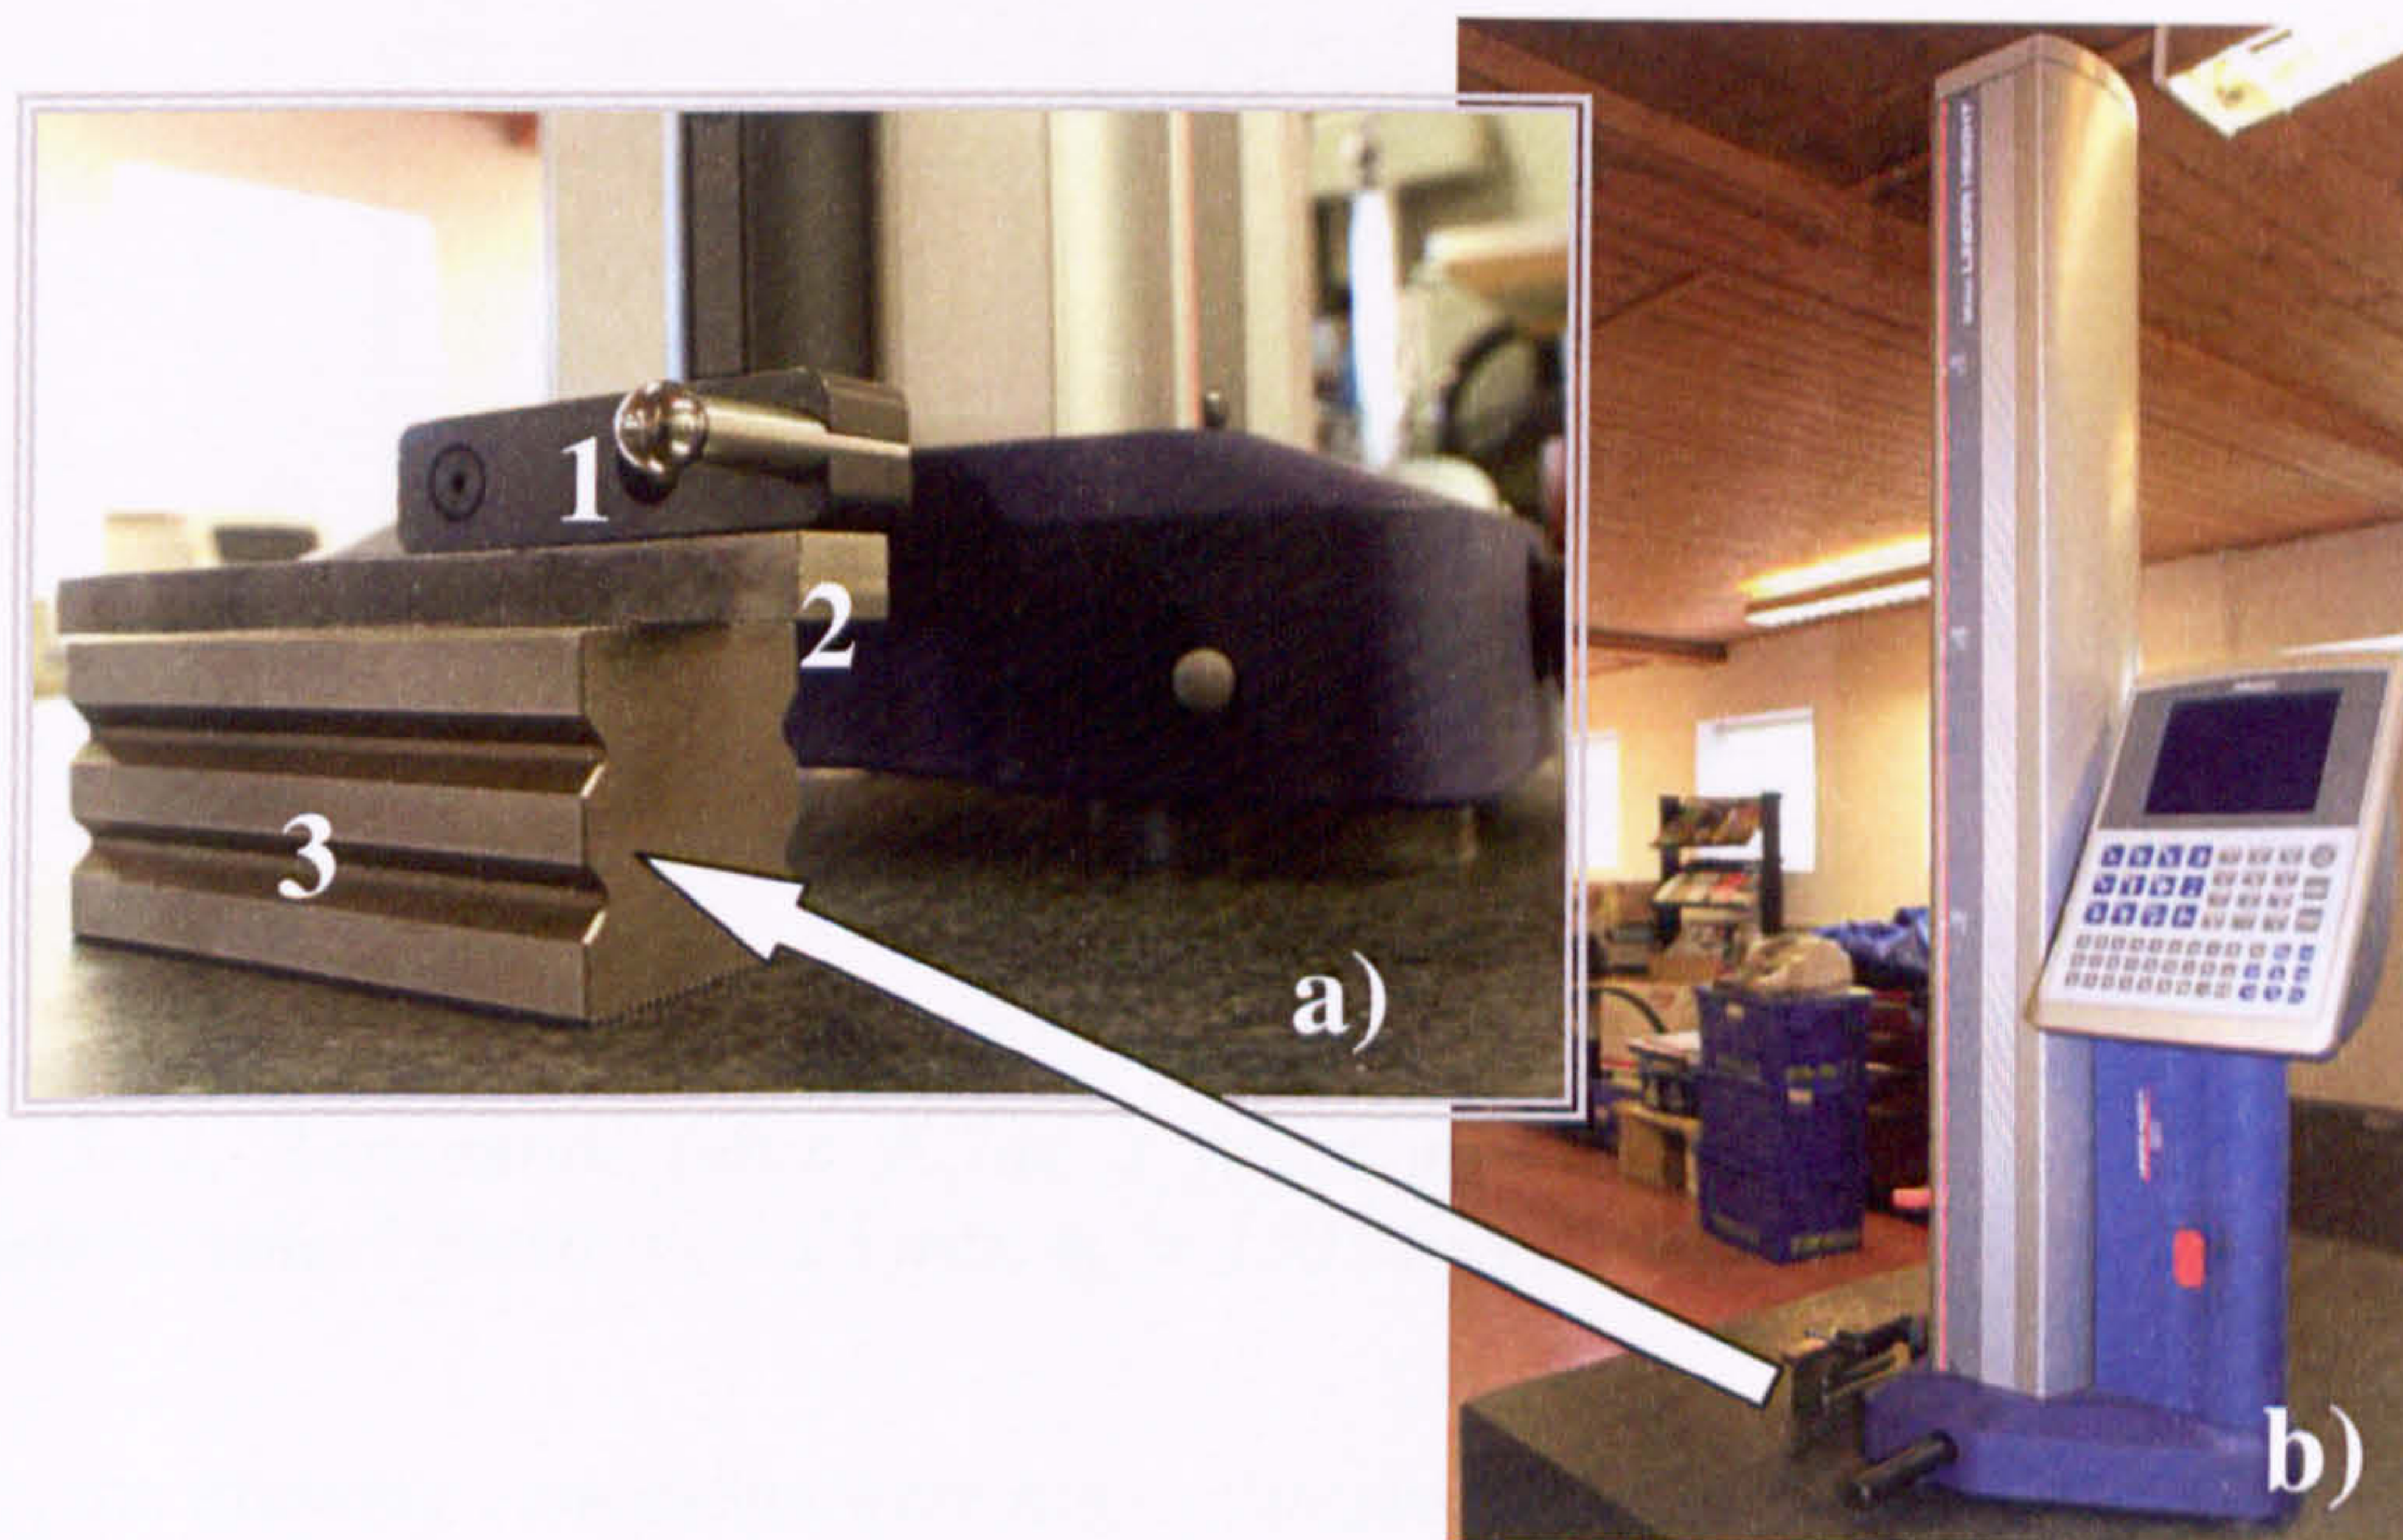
DOC measurements, where: a) base with the workpiece and b) Height gauge (1 – measuring head, 2 – workpiece 3 – support).
